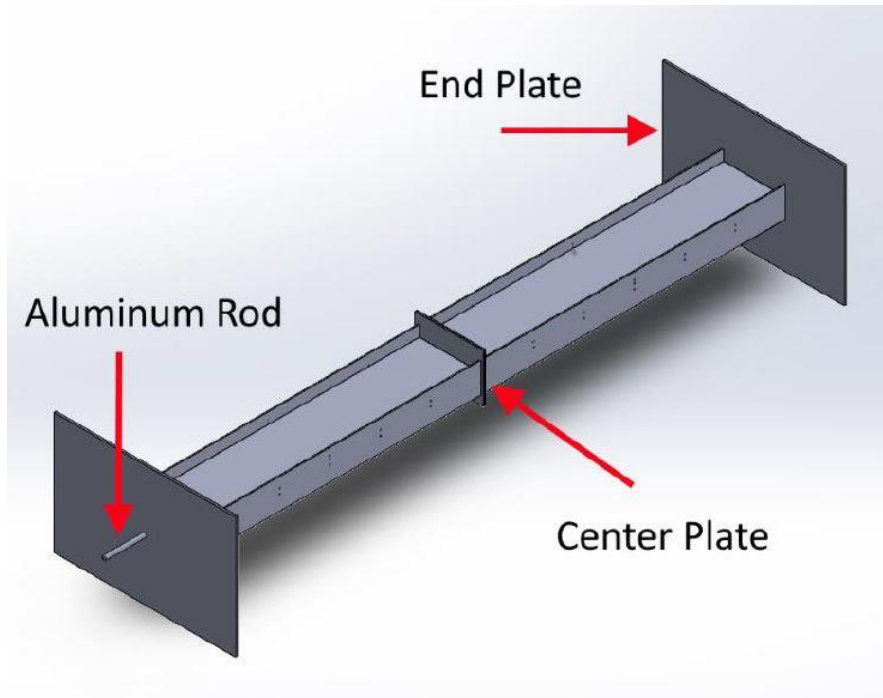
CAD drawing of 'H' section (Configuration 1) assembly
